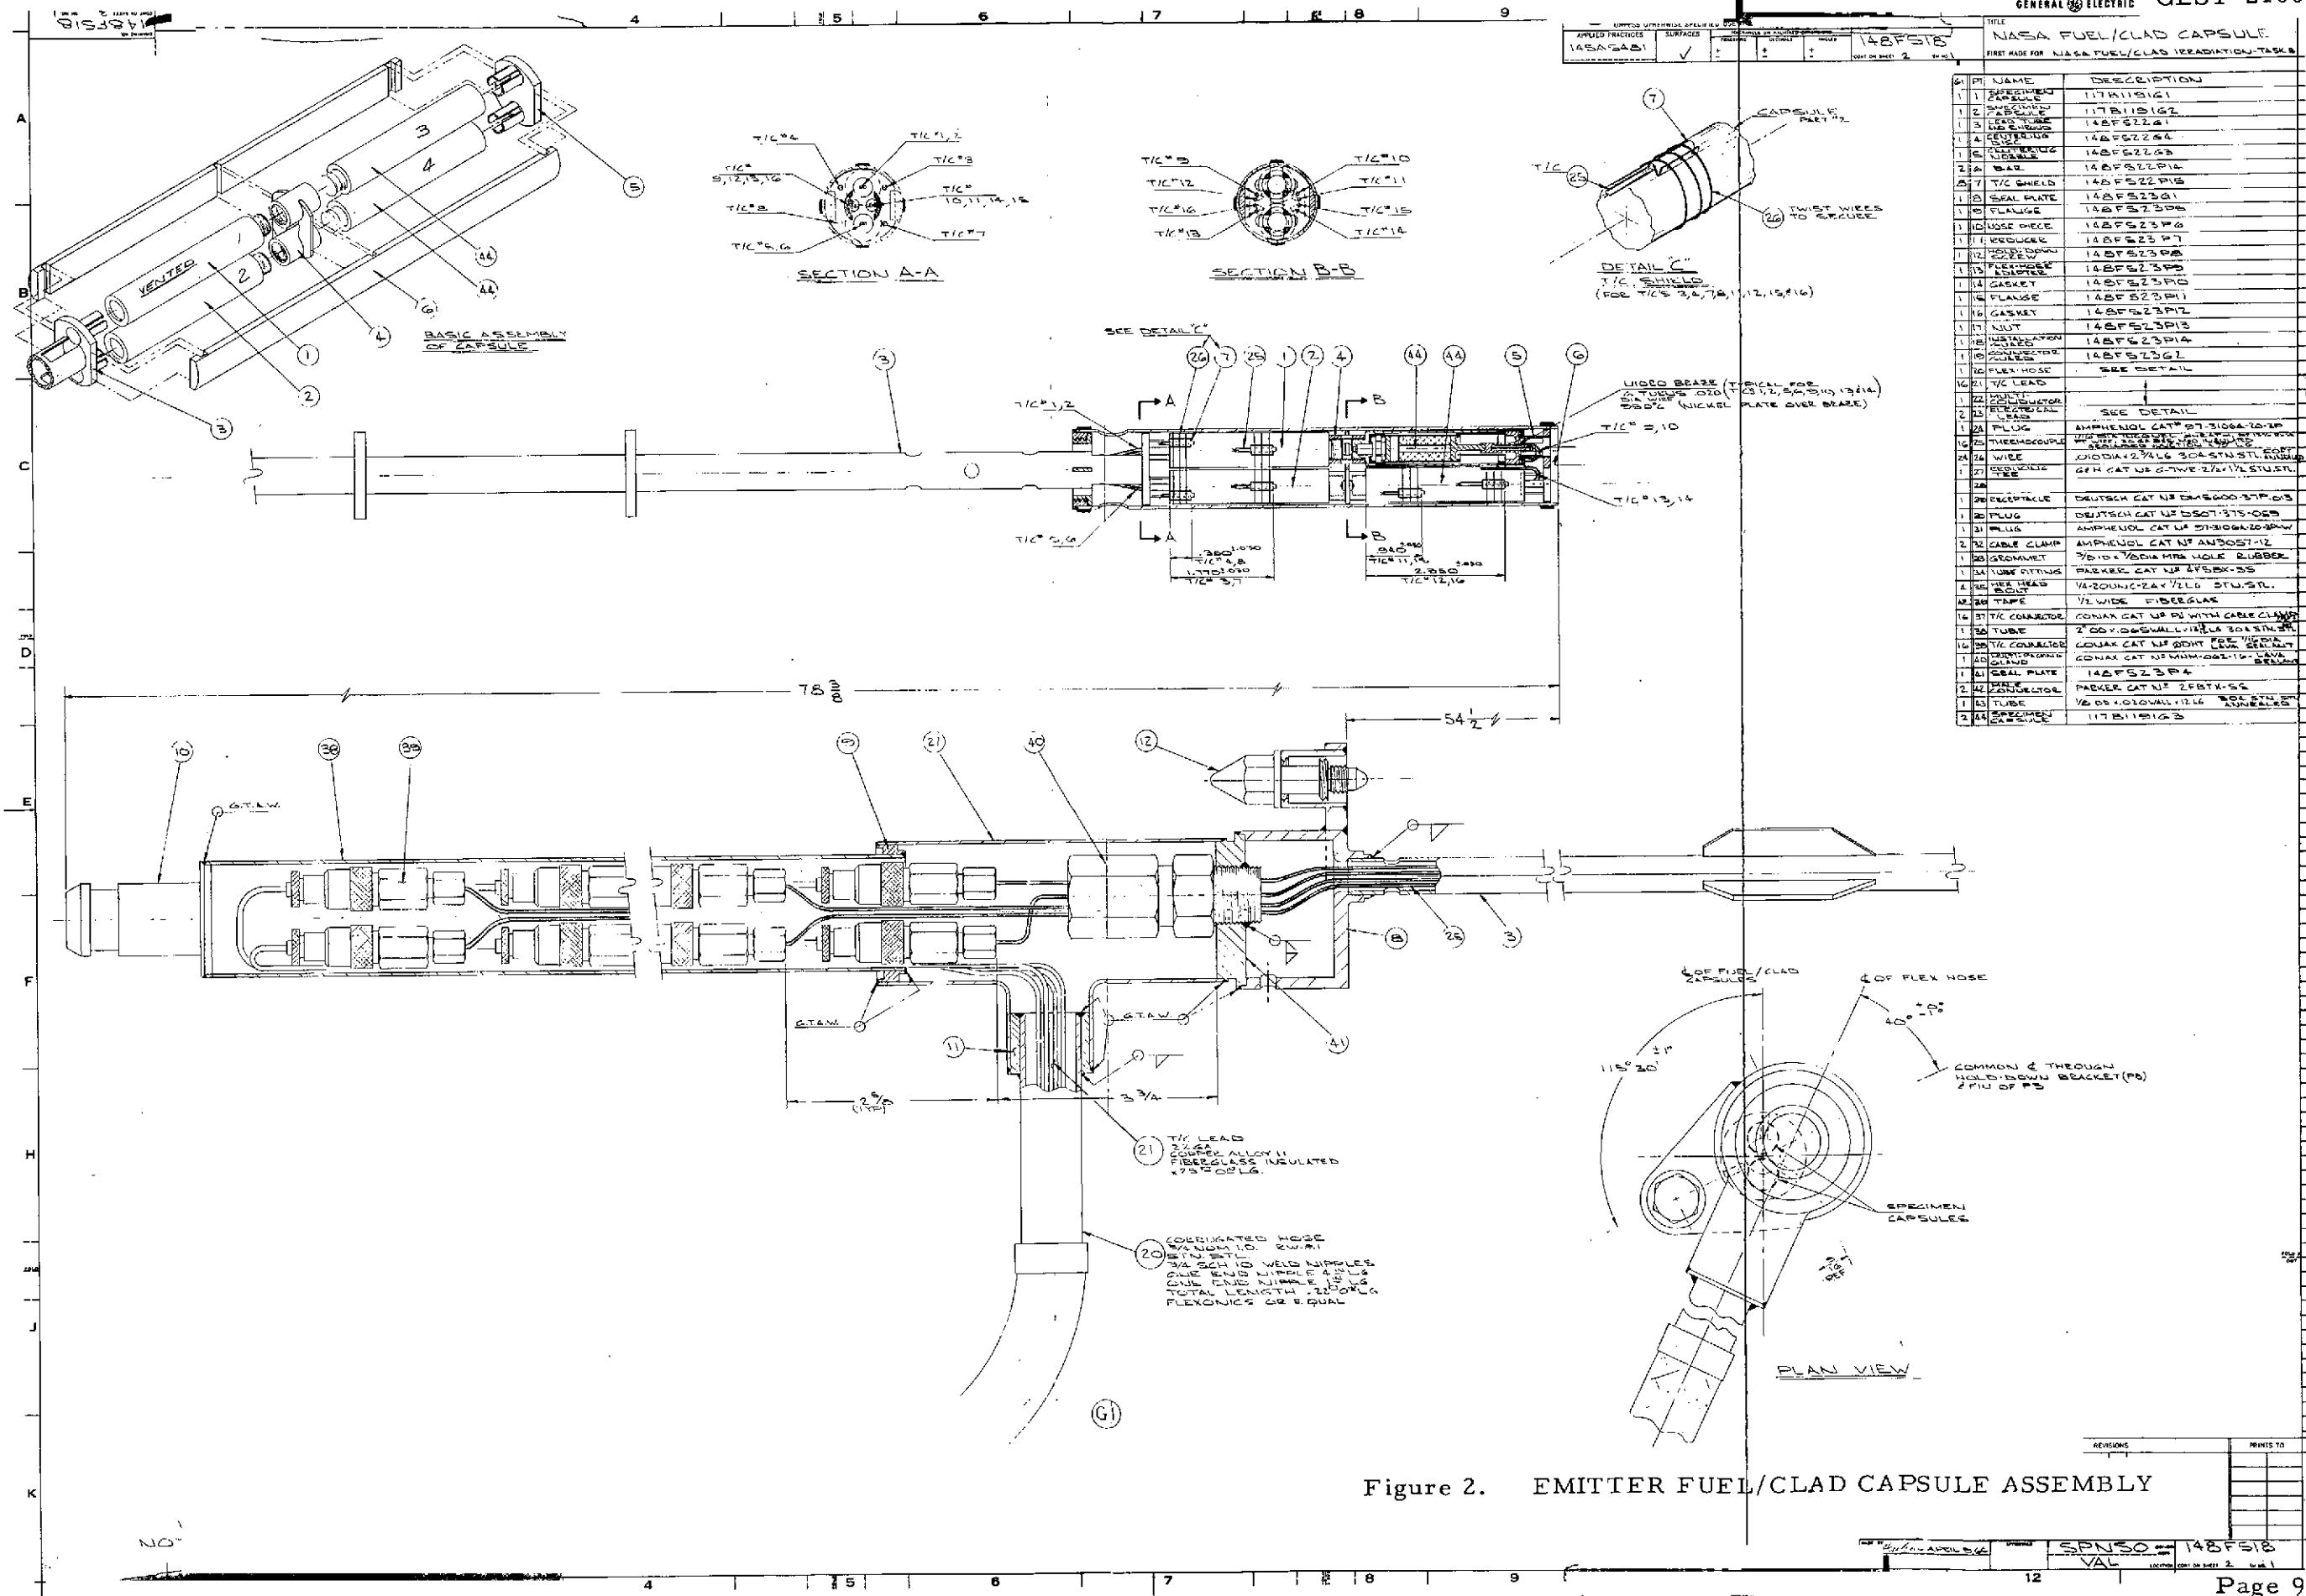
EMITTER FUEL/CLAD CAPSULE ASSEMBLY
